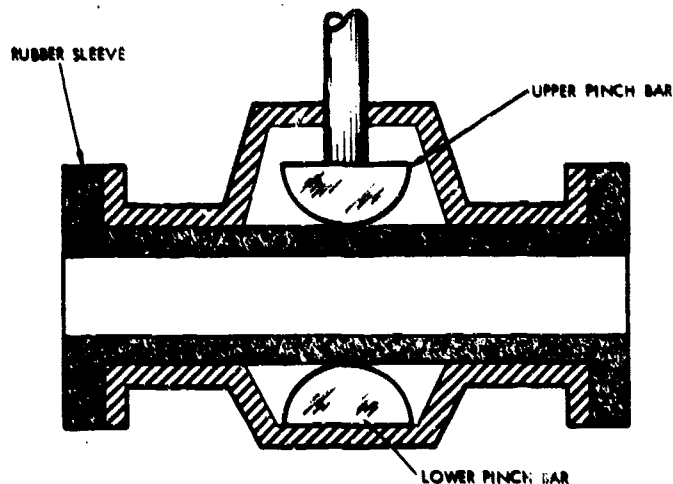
Pinch Valve, Mechanical Actuation
